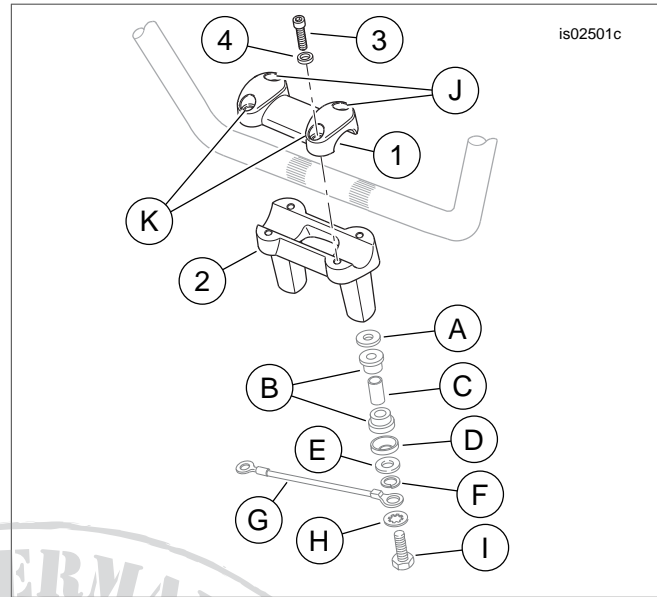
Service Parts, One-Piece Fat Handlebar Riser Kits
